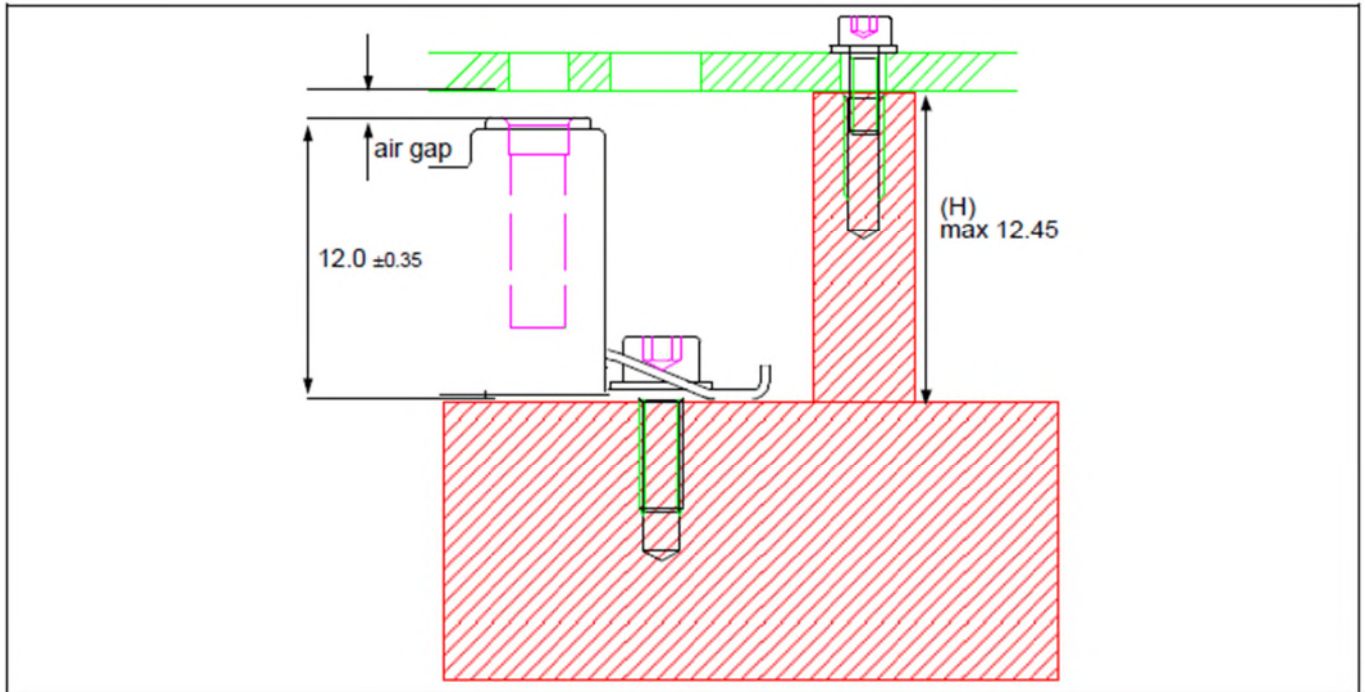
shows a zoom of the final system assembly. Depending on the height of the module, a small air gap remains between module and PCB.
